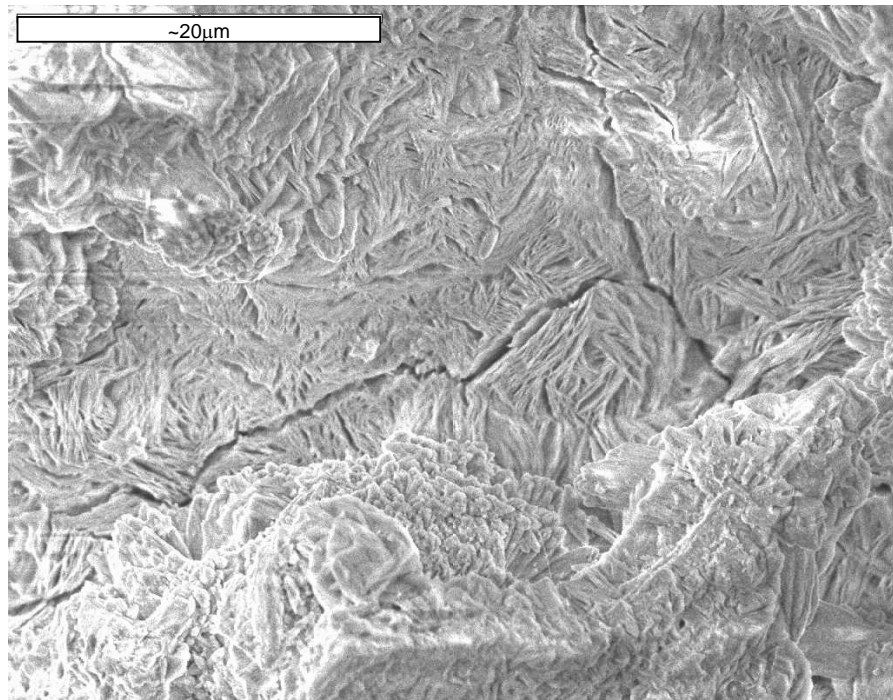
Deposit on fracture surface of rotor blade.
